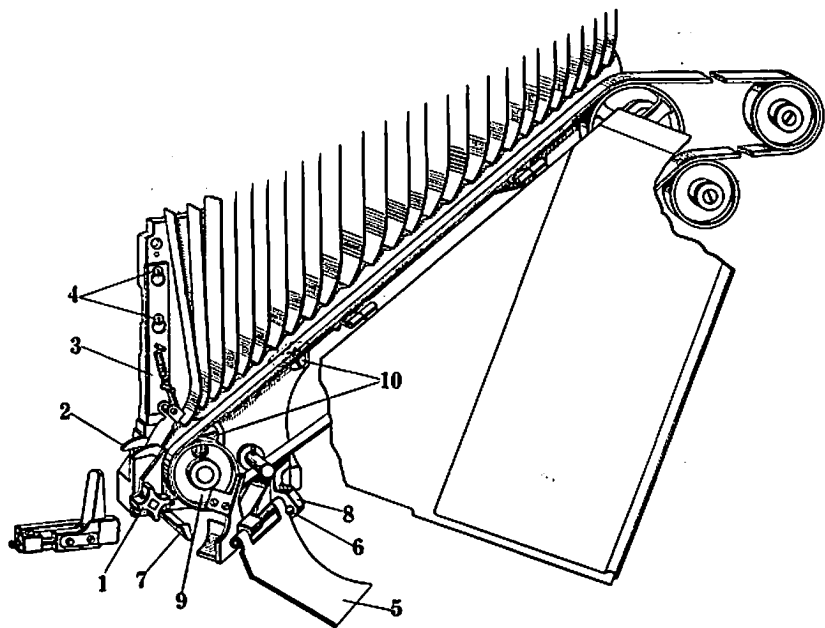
The Intertype Positive Assembler. This view shows how to renew the assembler star 1. Open the assembler cover 5 until detent 6 holds it down. Raise the assembling elevator slightly, depress cover 5 to release spring catch 7 and swing out the pivoted chute block 8. The simple construction of this device makes it possible to keep star wheels in good condition at all times.
